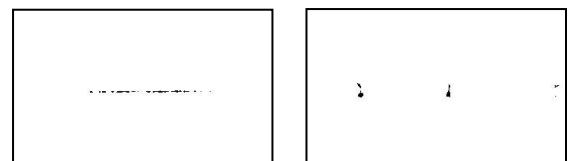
Separation of welding defect from welding area by new algorithm for lack of penetration and slag inclusion defects
